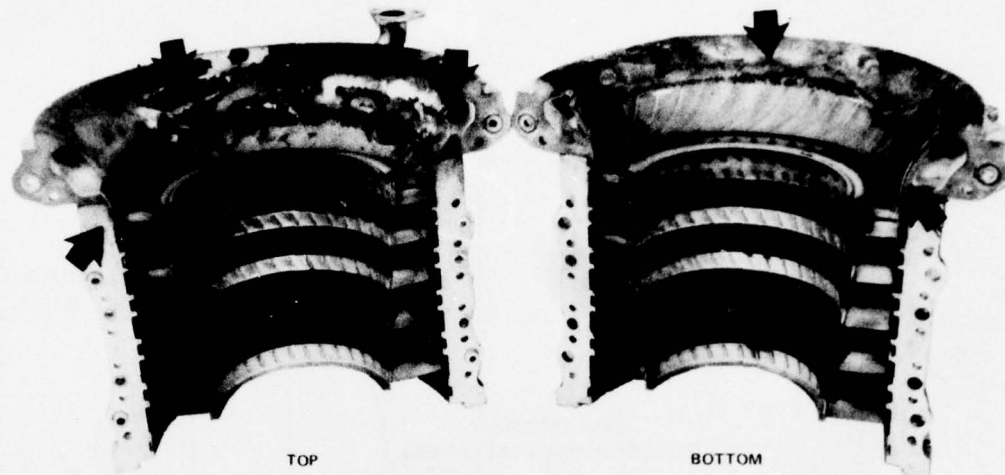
Centrifugal Compressor Housing Flame-Spray Repair
